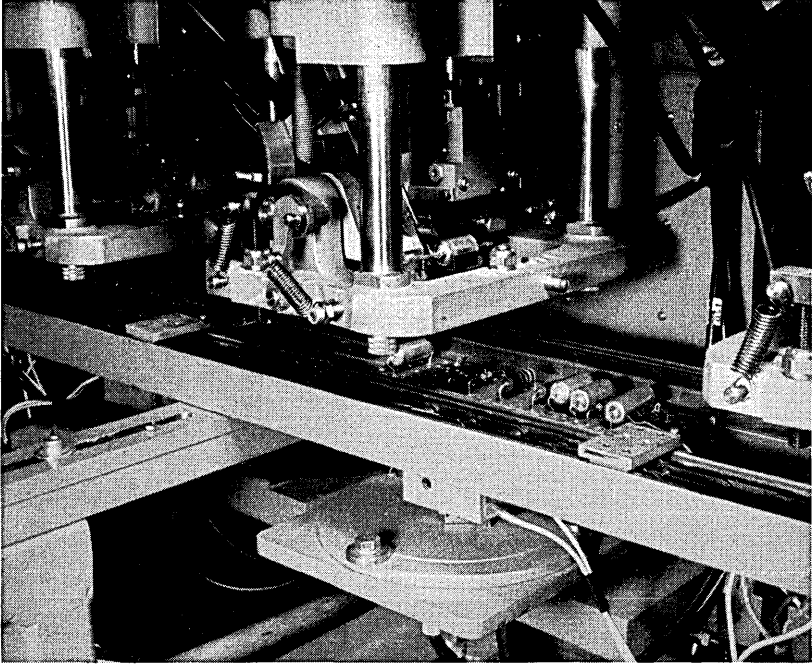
Close-up of attaching head inserting transformer onto circuit board
